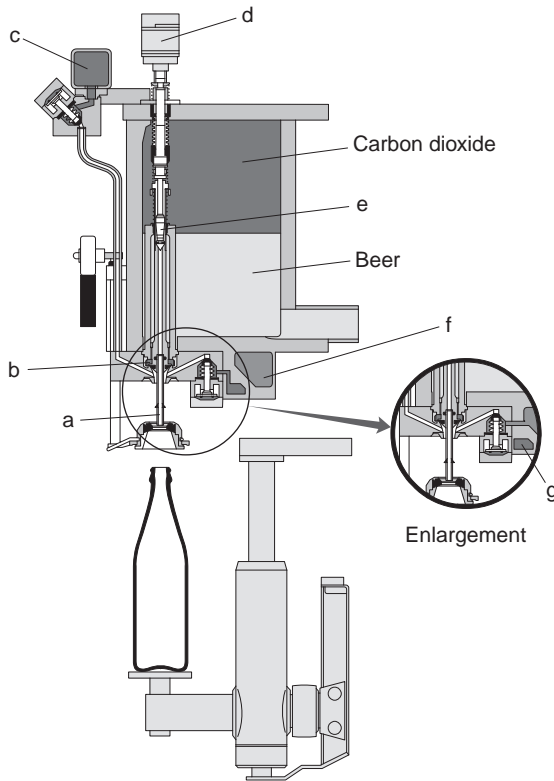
Bottle filling, section view; basic position before the bottle is lifted onto the filling head (air in bottle); a, vent tube; b, siphon type gas lock; c, correction channel; d, control cylinder for liquid valve and pressurizing; e, gas needle; f, vacuum/CIP channel; g, sniff channel (by courtesy of Kronen).
